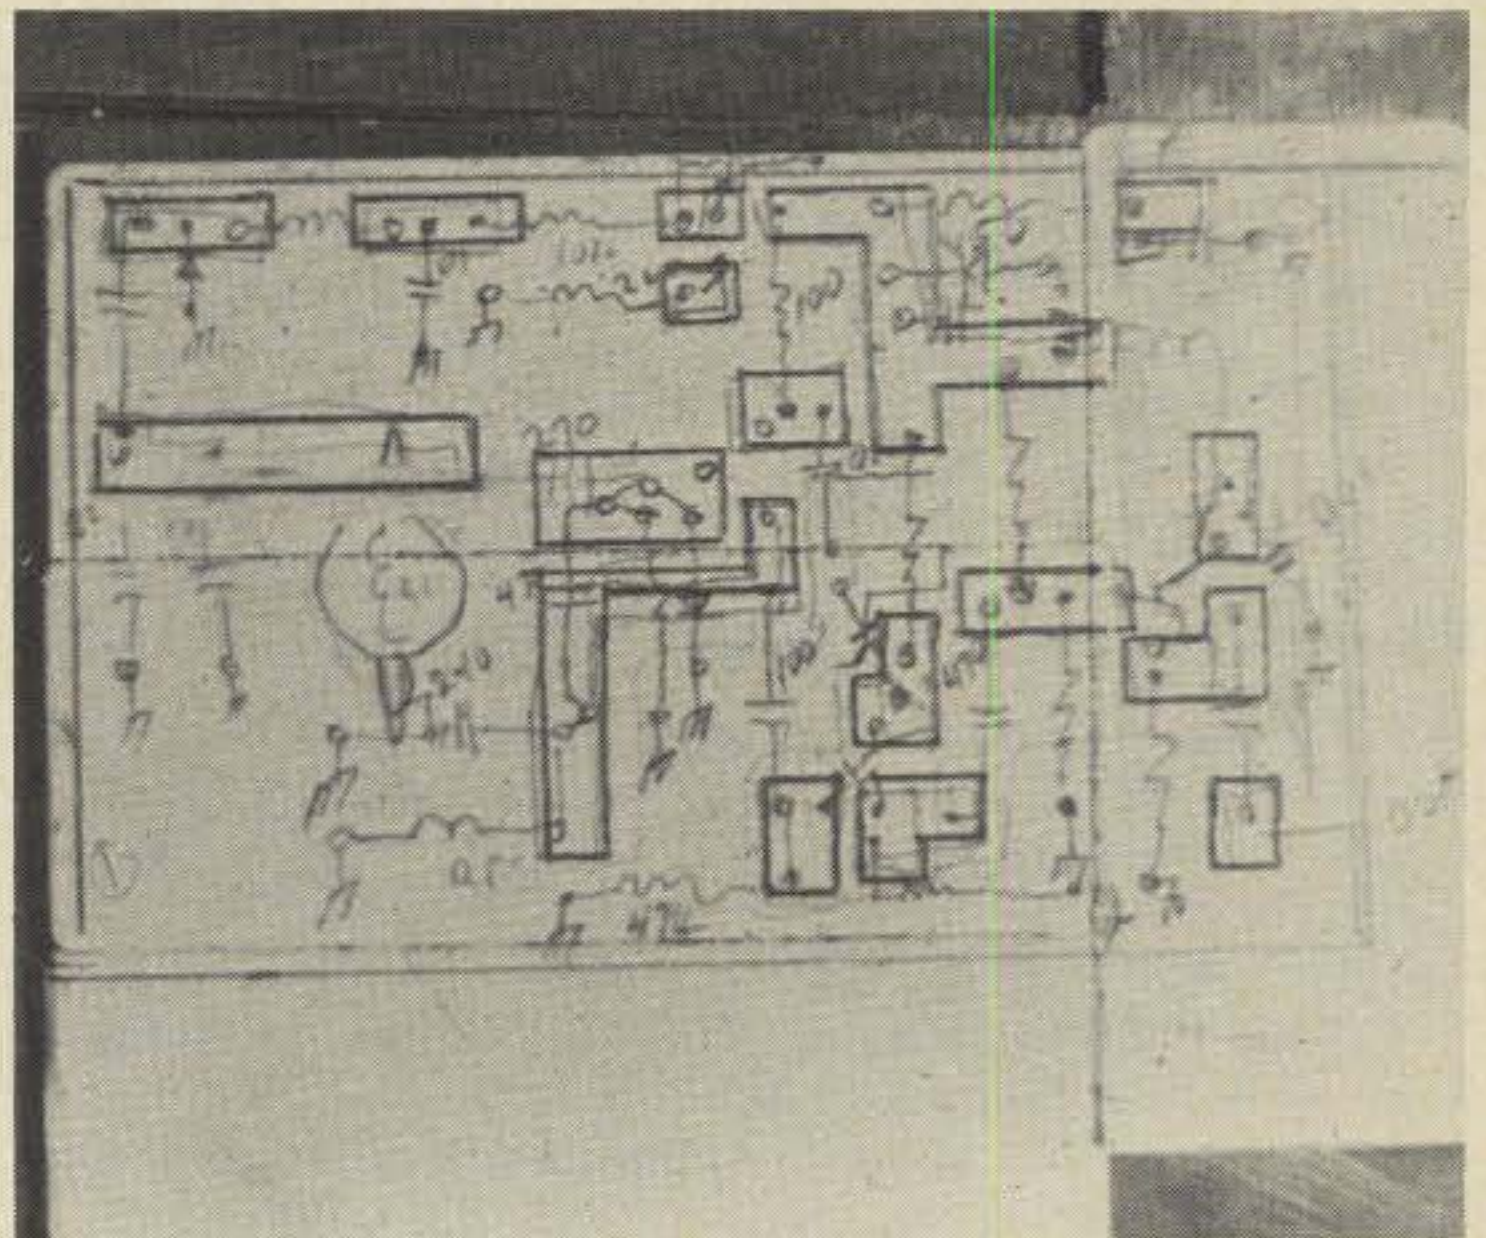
A straight-edge and sharp tipped pencil are used to outline the pads in final form.
